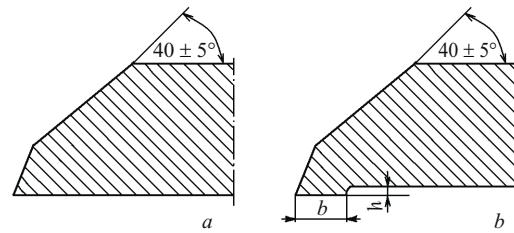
Sections of glass melt gob cutting blades of ordinary (a) and experimental (b) designs.
